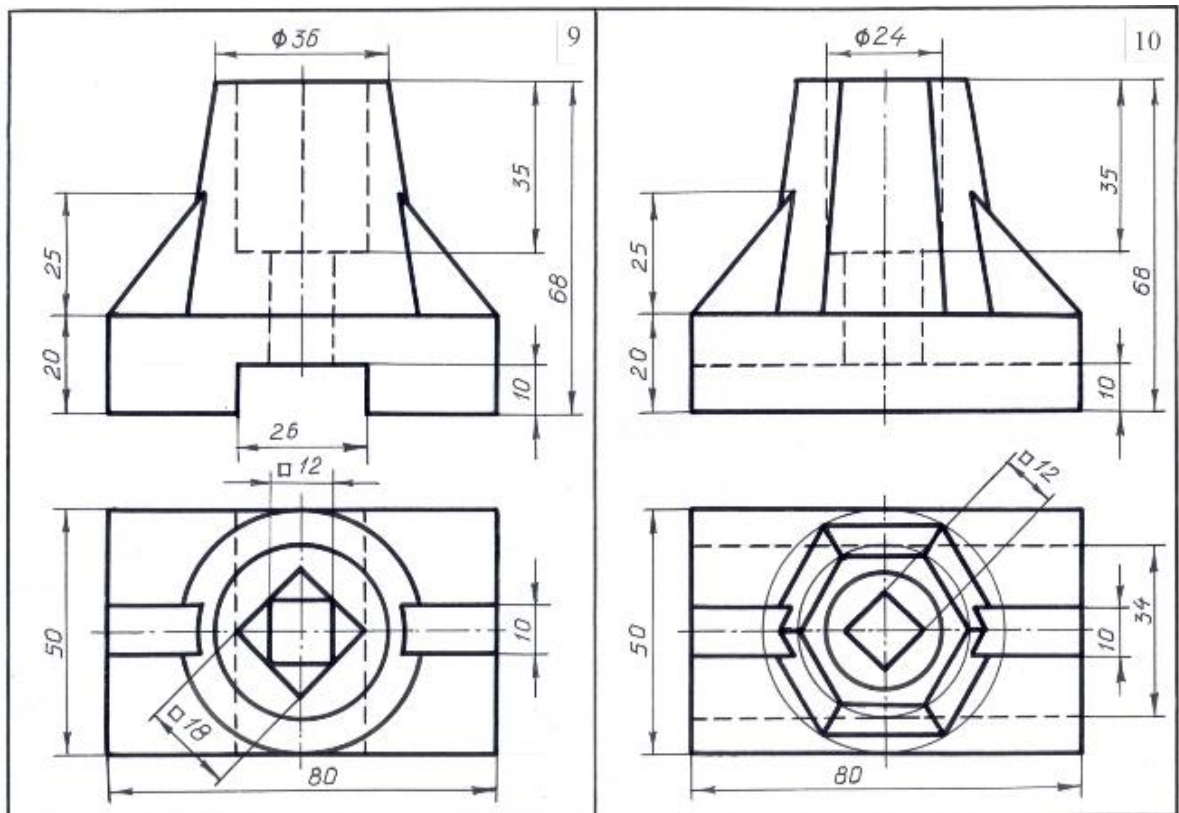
shows the orthographic projections of a mechanical part. The top view is a rectangle with a central hexagonal hole and a square hole. The front view is a trapezoid with a central cylindrical hole. The side view is a trapezoid with a central cylindrical hole. Dimensions are given in millimeters.
